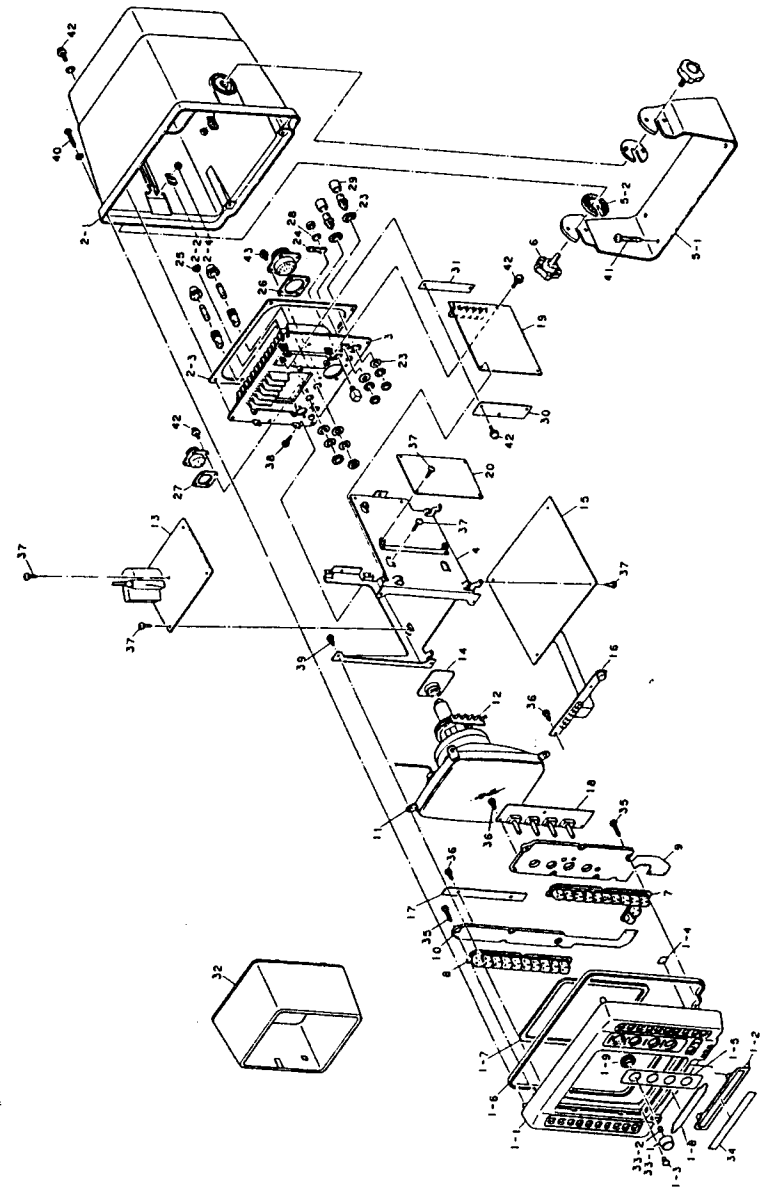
ASSEMBLY DRAWING OF R10X/R11X DISPLAY UNIT
